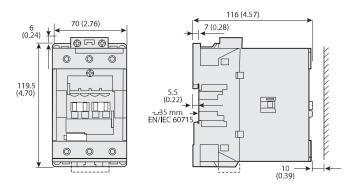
100-E80...100-E96 3-Pole Contactors with Frontmounted Auxiliary Contact
